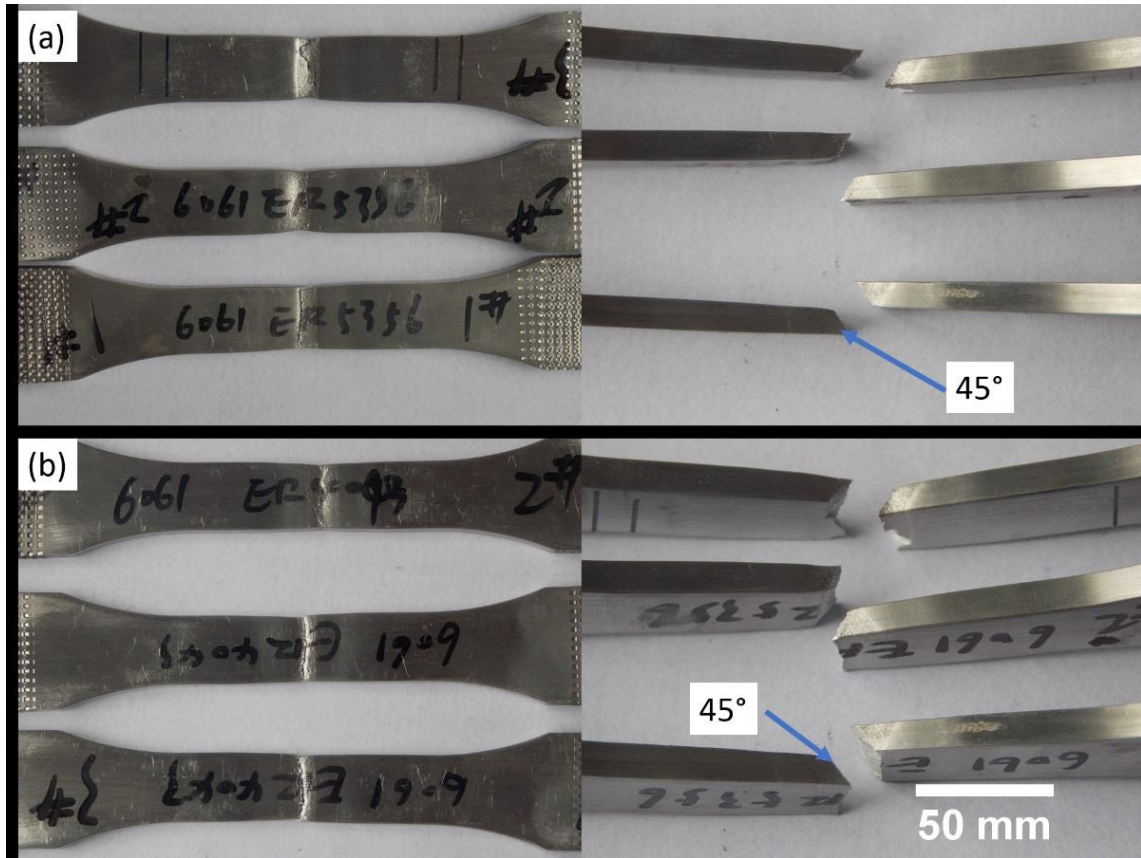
Macroscopic view of the fracture of the tested sample after tensile tests, (a) the ER5356 joint, (b) the ER4043 joint.
